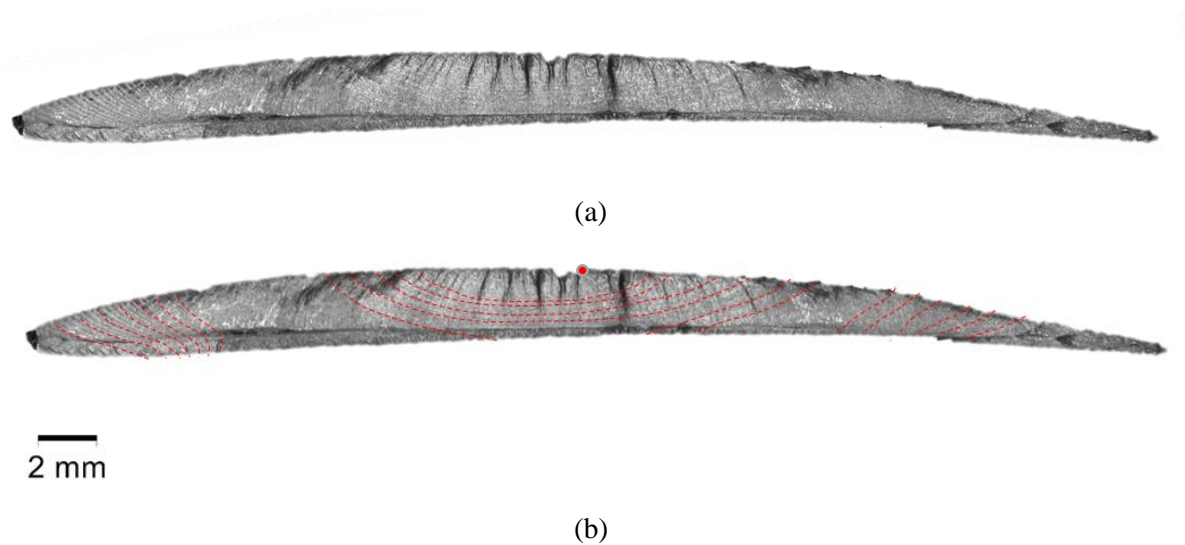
Optical microscope photos of fracture surface of a rotor blade subject to run to failure fatigue test (a), with marked fatigue beach marks (b).
